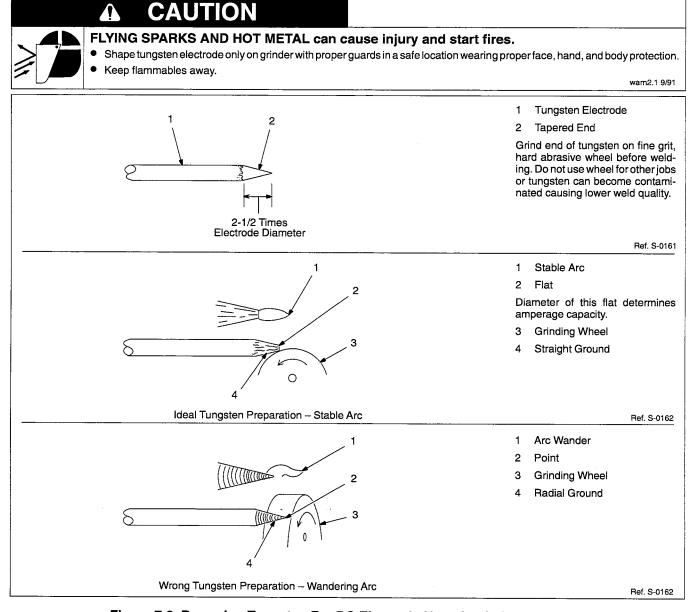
Preparing Tungsten For DC Electrode Negative (DCEN) Welding
